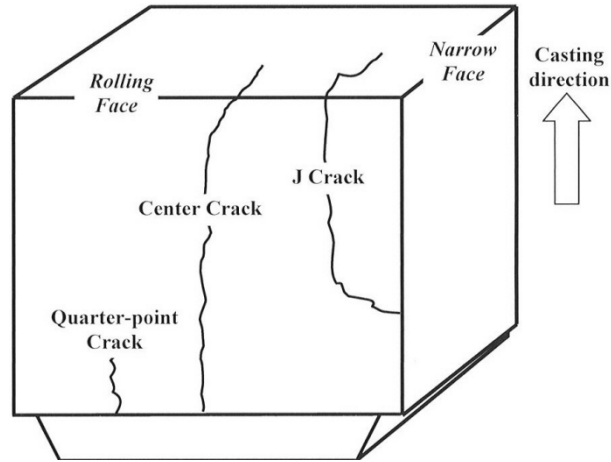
Schematic of cold crack defects related to secondary cooling during DC casting of aluminum [27].
